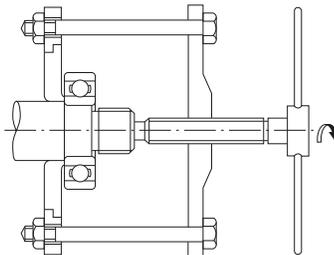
Removal of Inner Ring Using a Withdrawal Tool (1)
